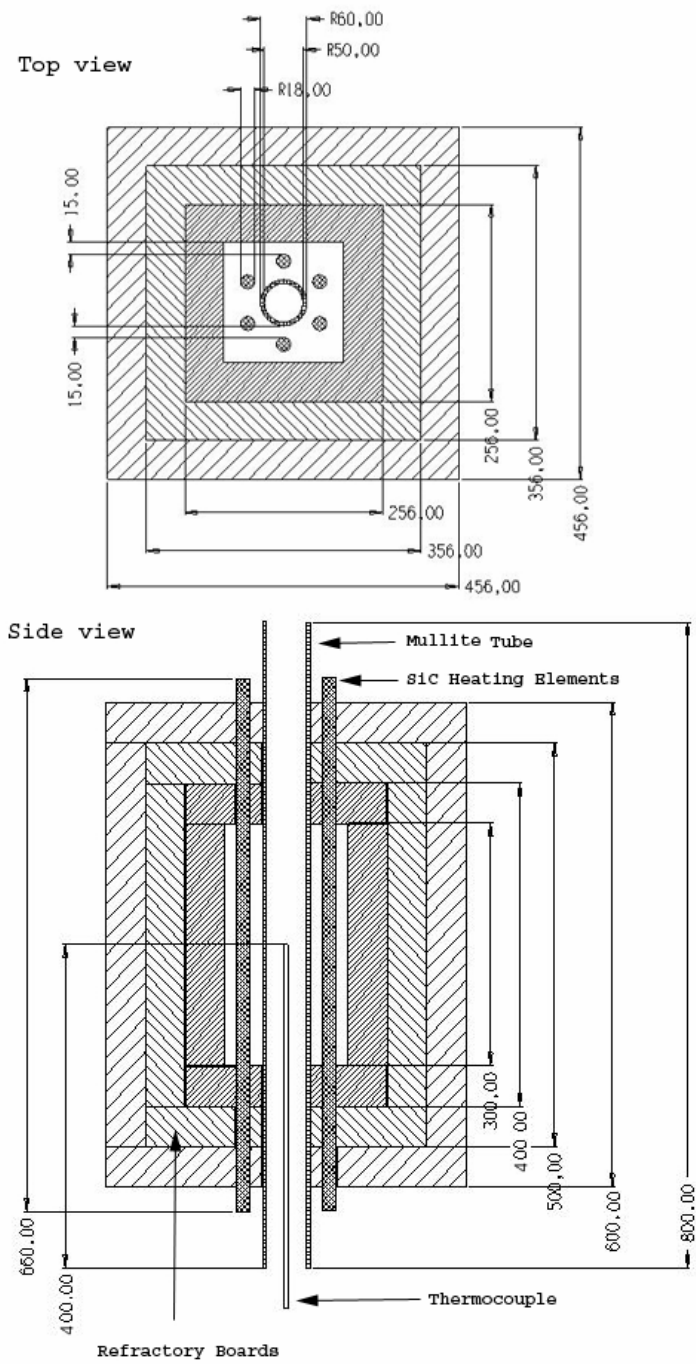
Top and side view drawings of the vertical tube furnace in which the experiments were performed. Dimensions are in millimeters.
